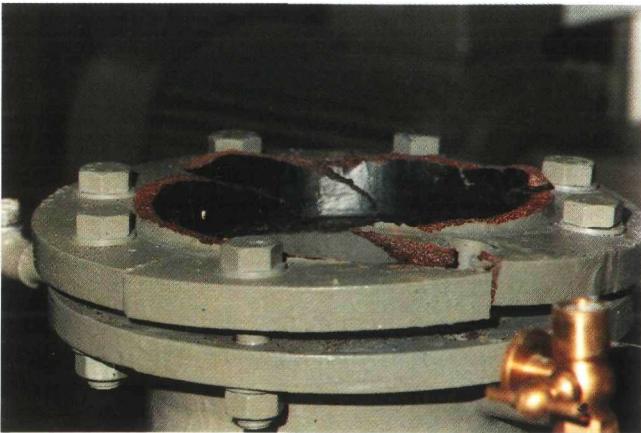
Sewer pipeline fracture. Detail showing fractured flange.
